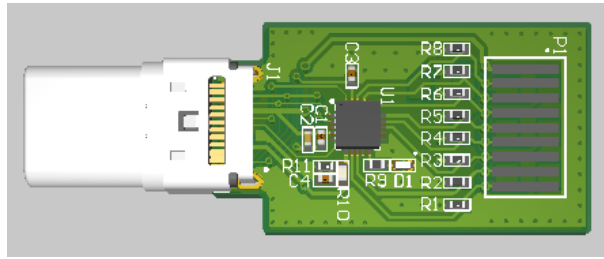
2nd Generation INSIGHT™ Sensors PCB
